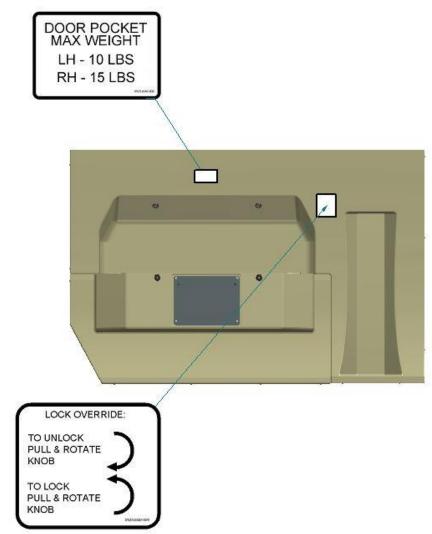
Pilot Lower Door Panel Assembly – P/N 09251030-001
